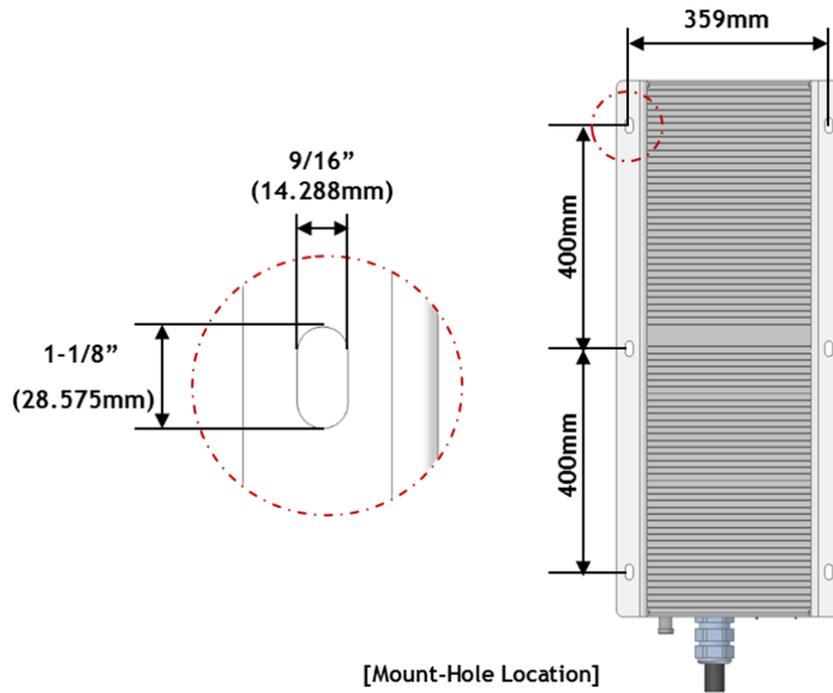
Dimension used to install REMOTE UNIT on the WALL
